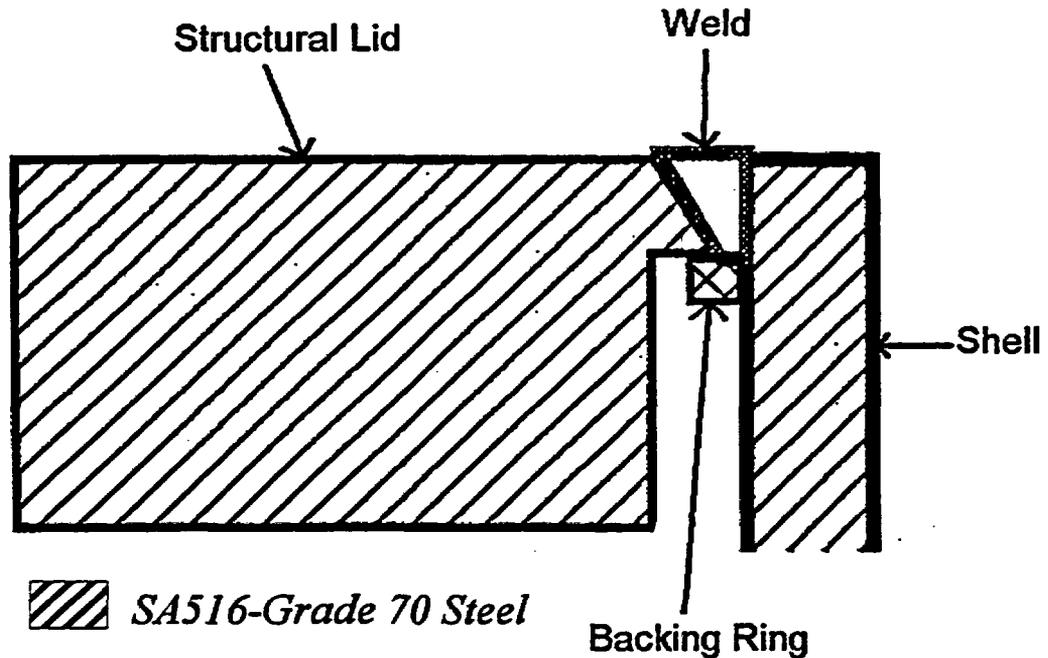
Structural lid to cylindrical shell weld geometry.
